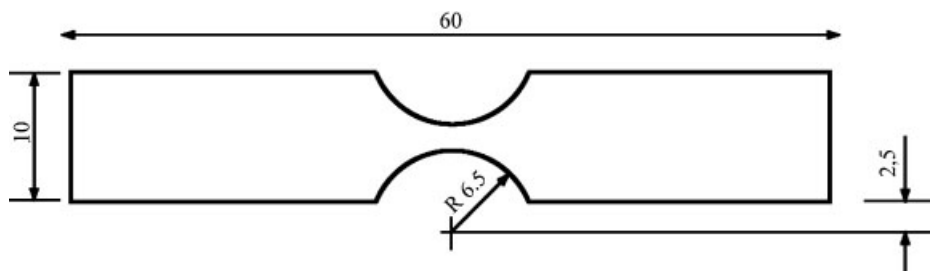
Geometry and dimensions (in mm) of the samples used in tensile test.
